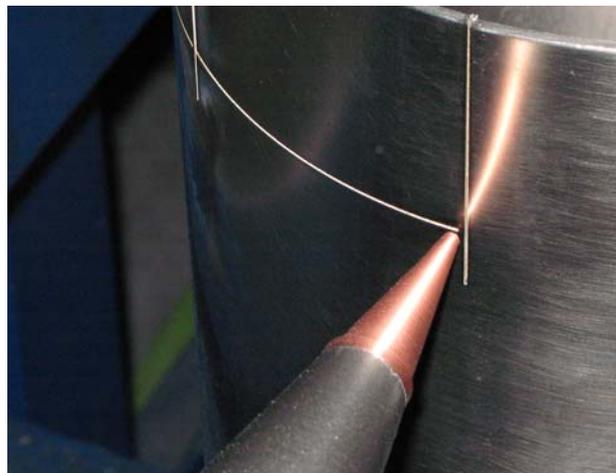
The Zirconium alloy tube was cut with very high speed of 6m per a minute, and cut-width was as narrow as 0.25mm or 0.15mm. Surface condition of the cutting edges is very beautiful and very smooth and slightly narrower than the Stainless steel cases.
